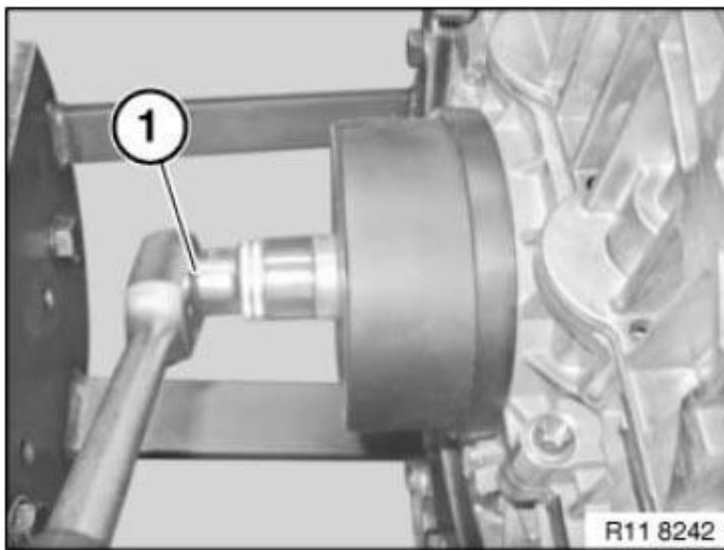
Screwing On Radial Shaft Seal Using Special Tool 11 9 183
